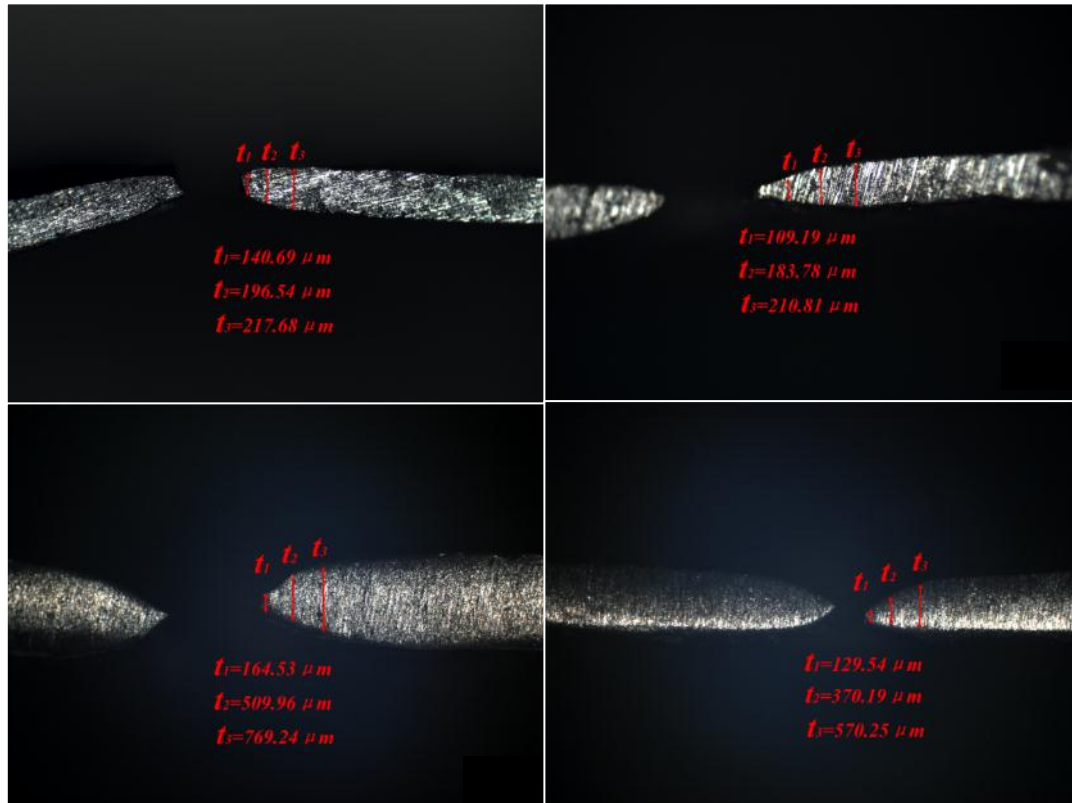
Cross-sectional view of the fracture region for AA1100 material: (a) cone part in ISF test; (b) pyramid part in ISF test; (c) bulge test part under plane-strain condition; (d) bulge test part under equibiaxial stretching condition
